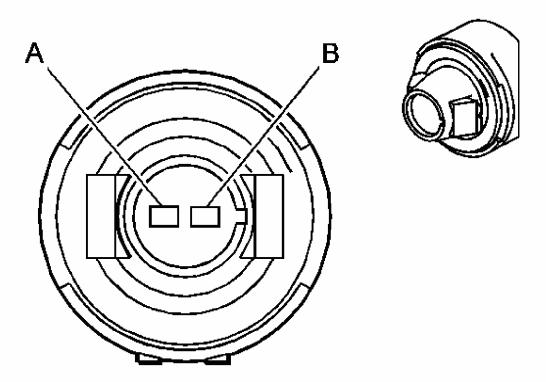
Left Rear Marker Lamp Connector End View Courtesy of GENERAL MOTORS CORP.
